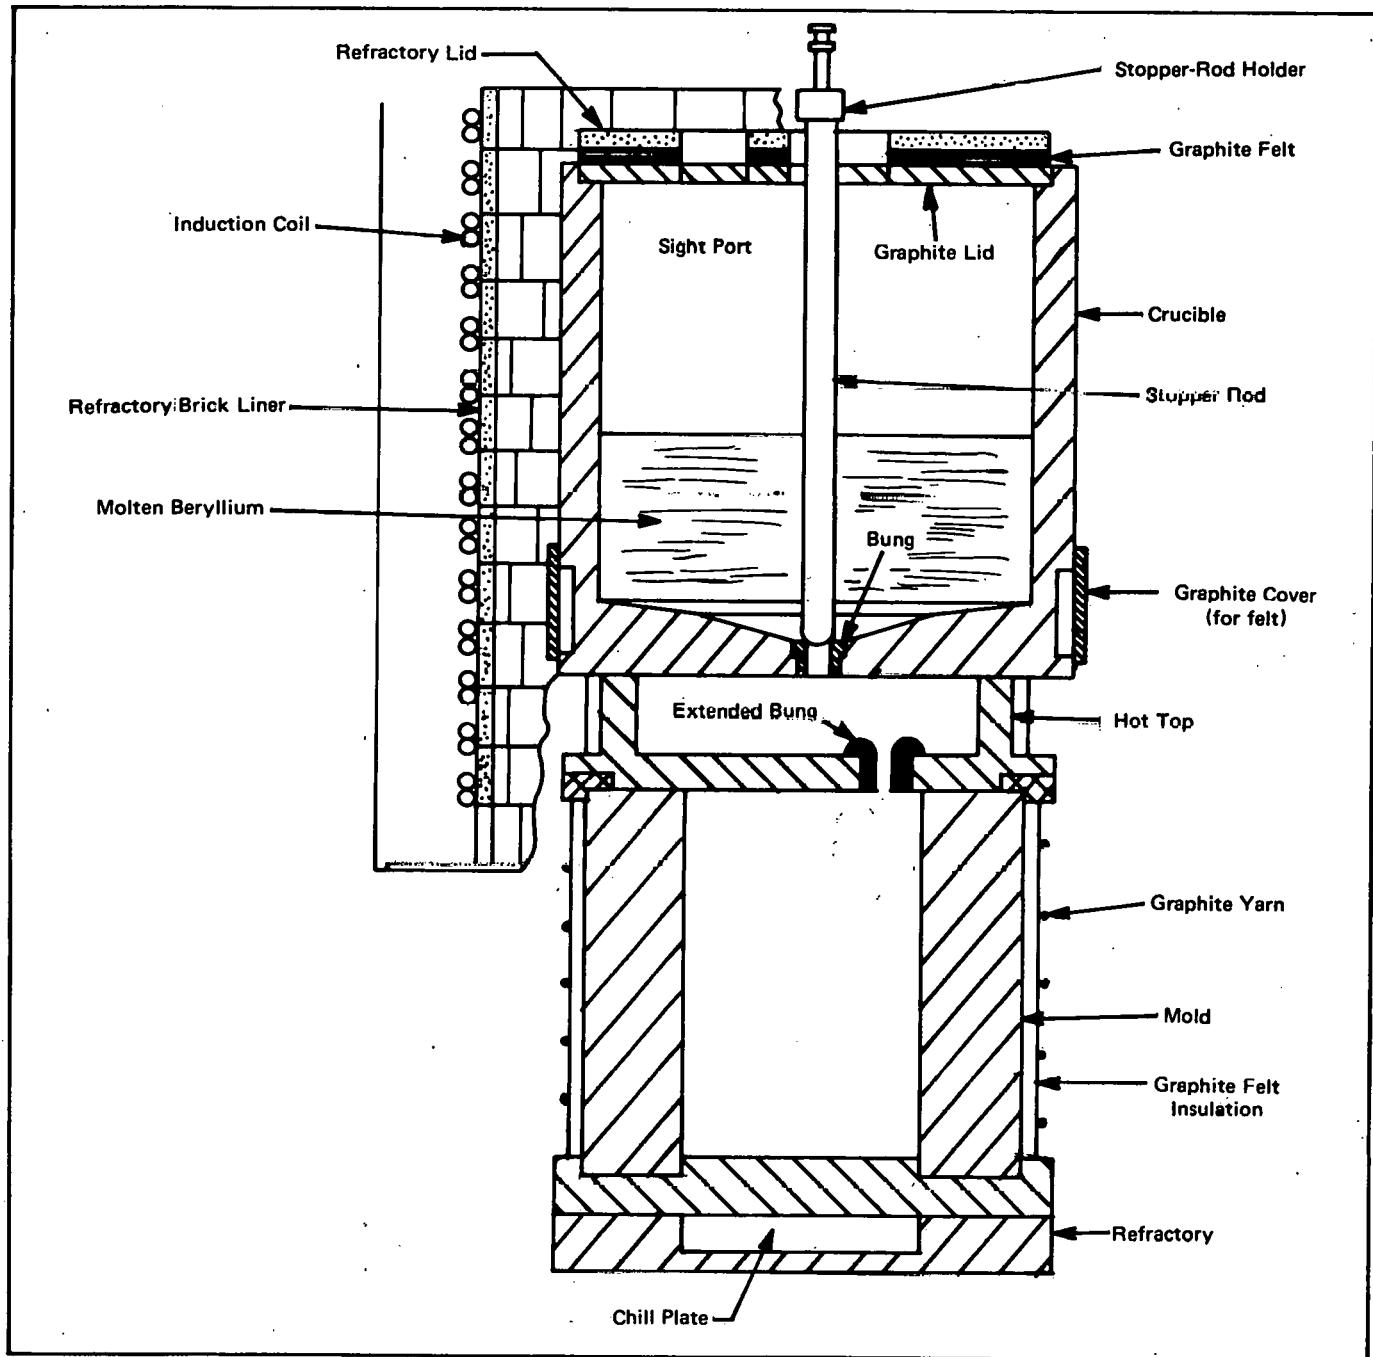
Cross - Sectional View of the Mold - Crucible Arrangement Used to Cast Large Beryllium Ingots
